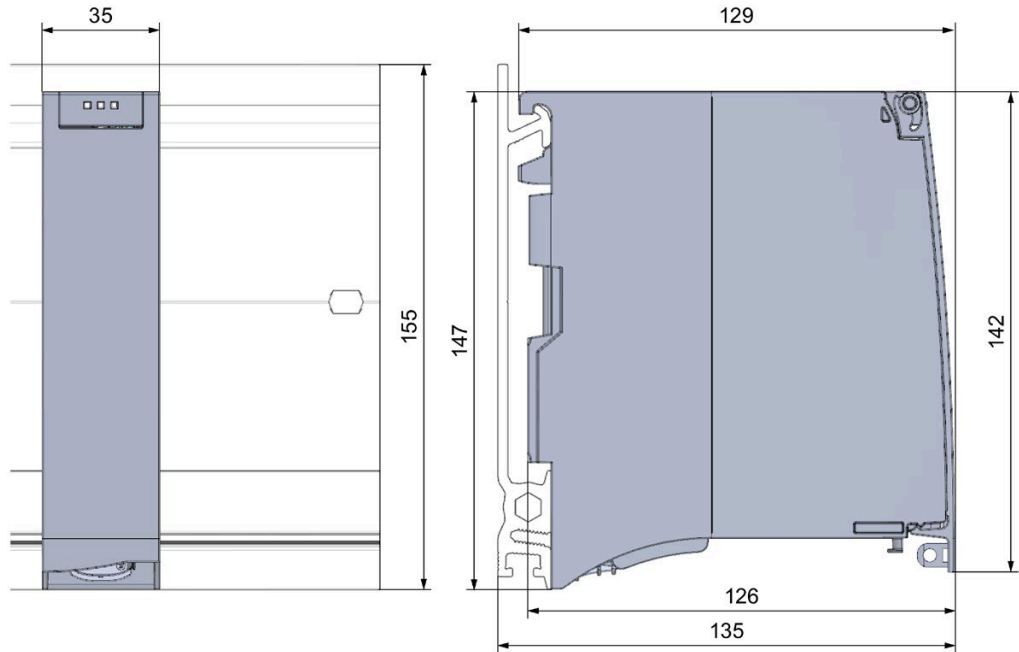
Dimensional drawing of the DQ 64x24VDC/0.3A SNK BA module
